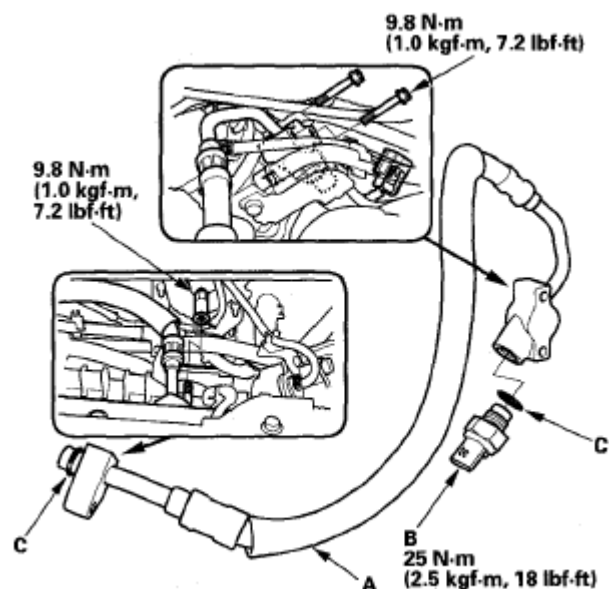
Identifying Fuel Feed Hose, Fuel Rail Pressure Sensor With Torque Specifications
